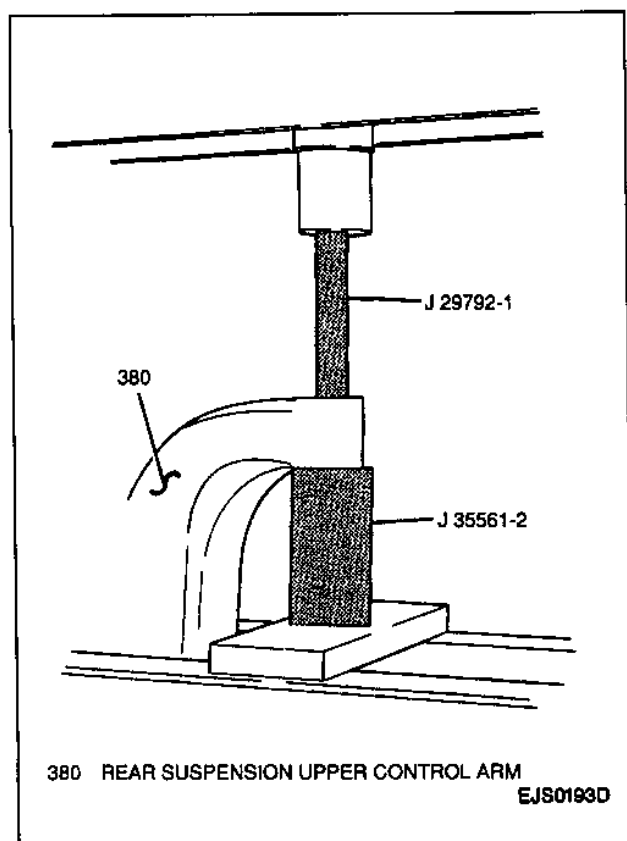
Removing Rear Suspension Upper Control Arm Bushing
